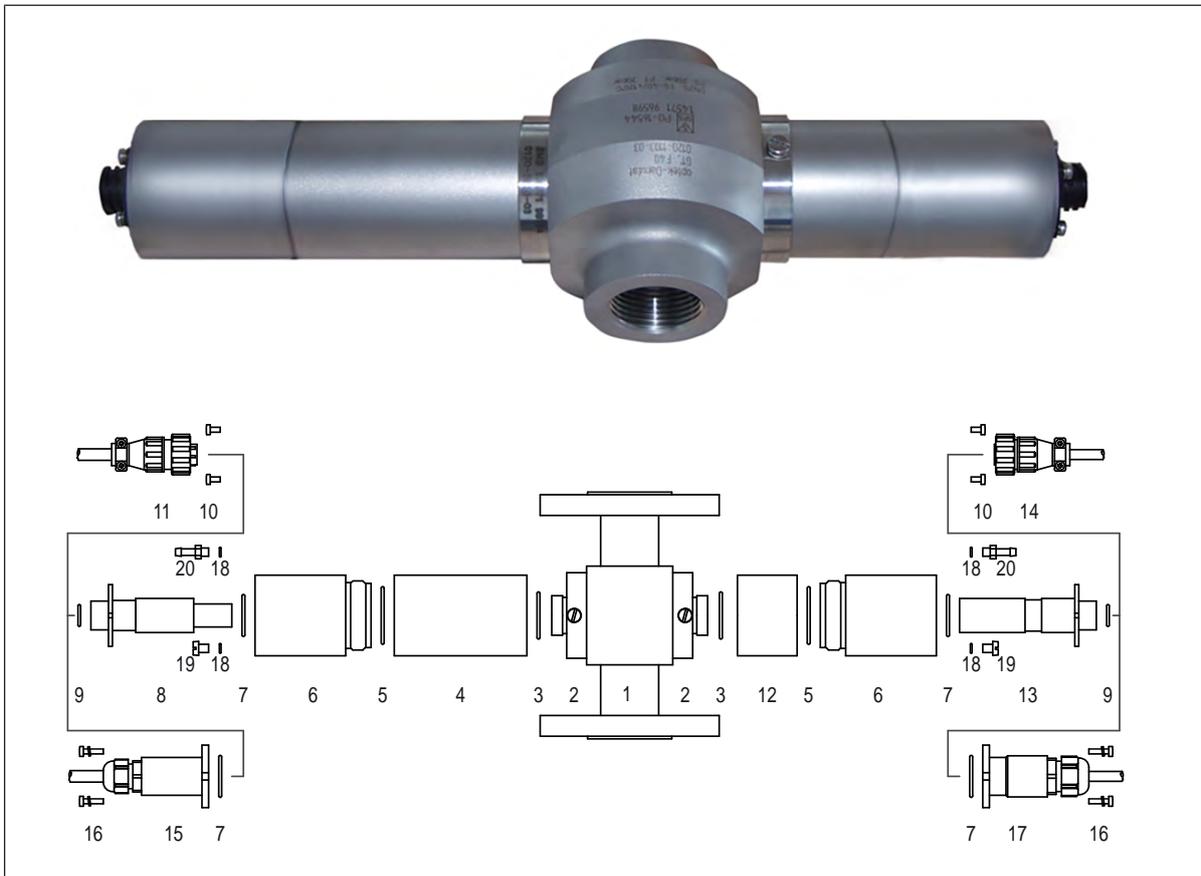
Photo and exploded view AF16-PV-F / AF16-PV-N
